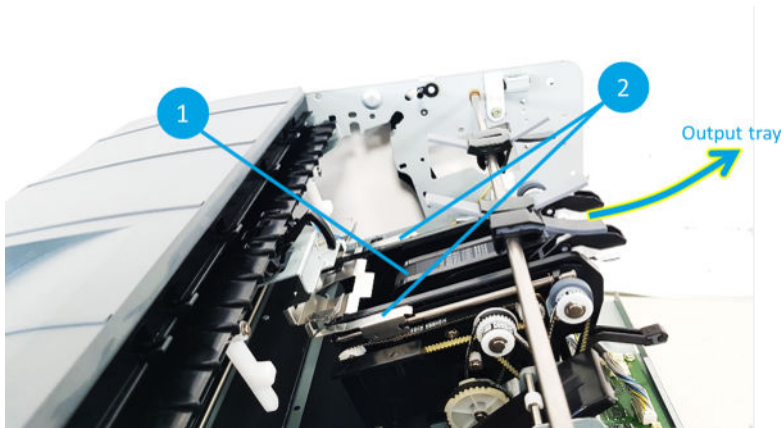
Inner finisher system - ejector unit detail view (2/3)
